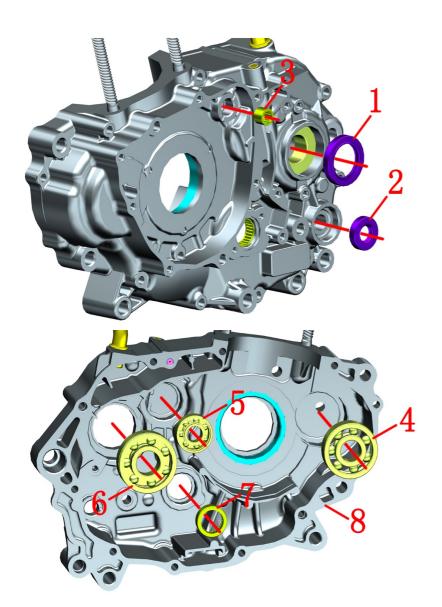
LEFT CRANKCASE ASSEMBLY		After-sales spare parts for left crankcase	CHK	Q
